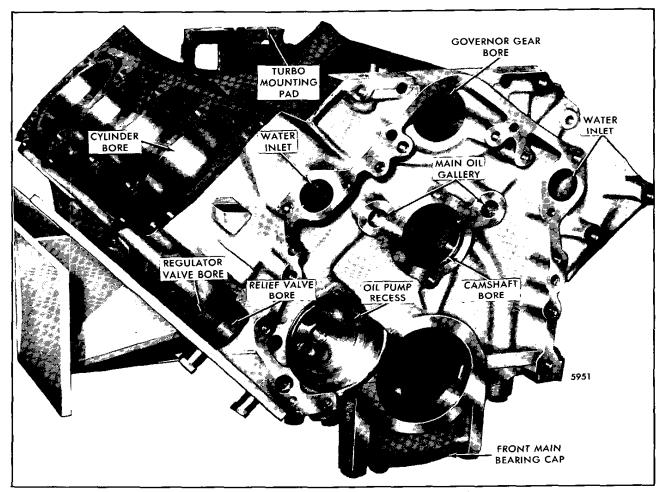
Location of Oil Pressure Regulator and Relief Valve Bores
